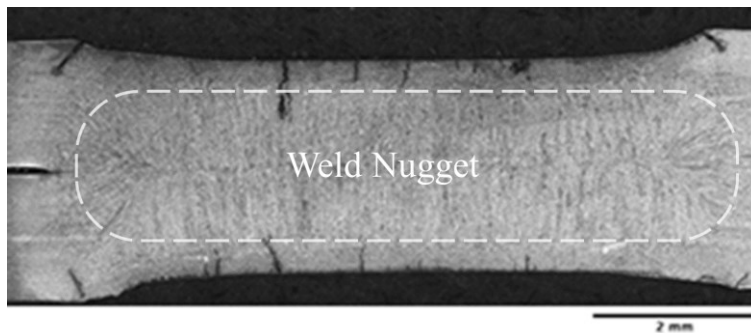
Typical weld cross-section of the standard welding current case
